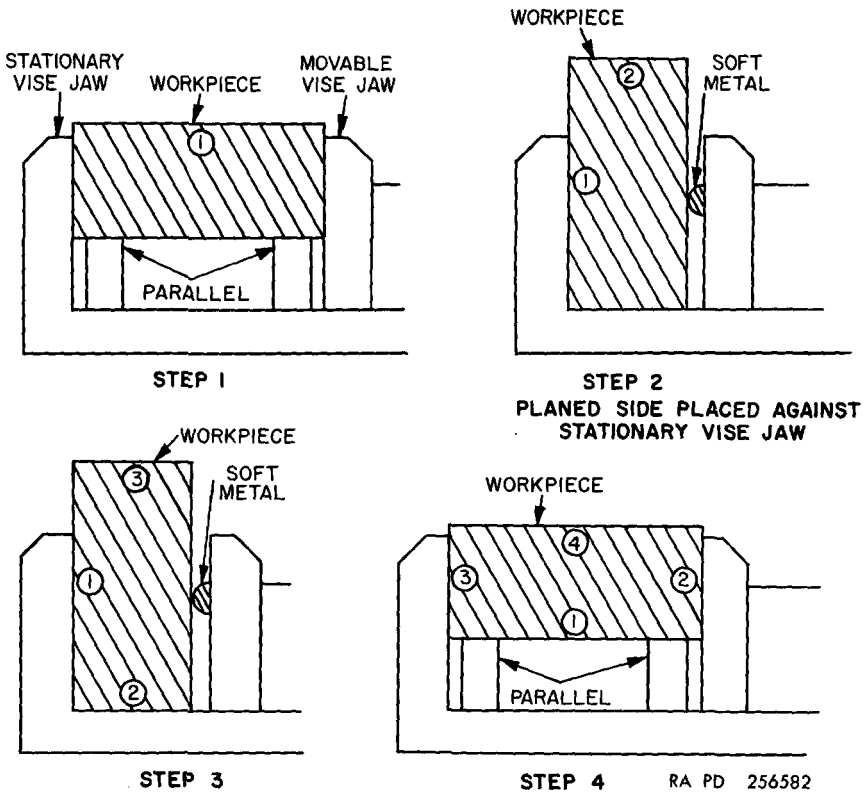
Sequence of steps for squaring a workpiece mounted in the vise.
